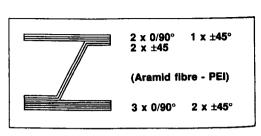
Laminate Lay-Up for the Nose-Wheel Door [260]
